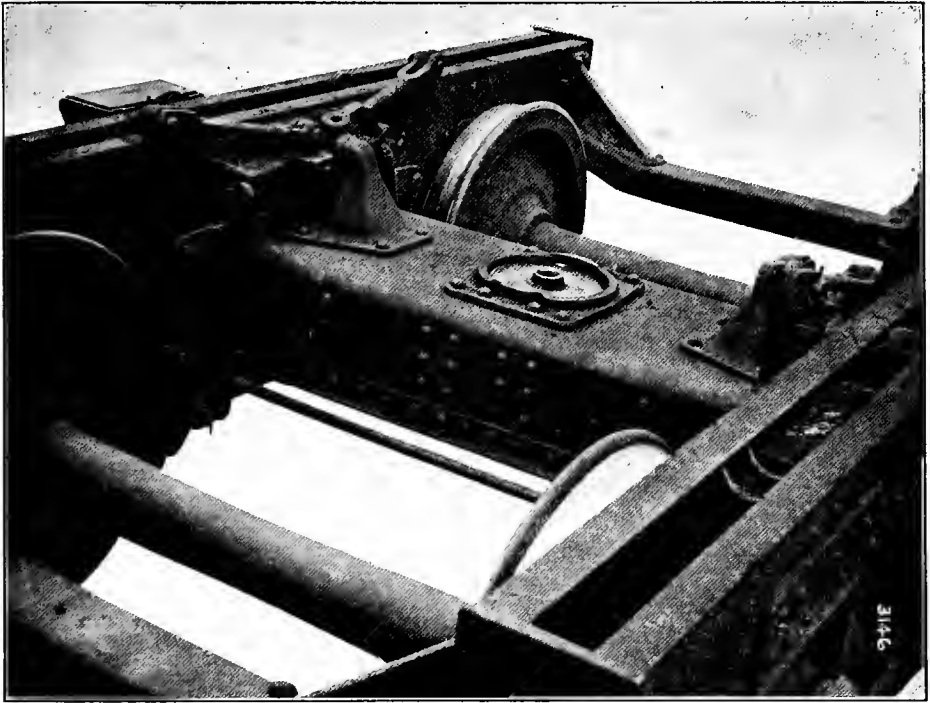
BRAKE RIGGING, STANDARD SINGLE SHOE BRAKE
